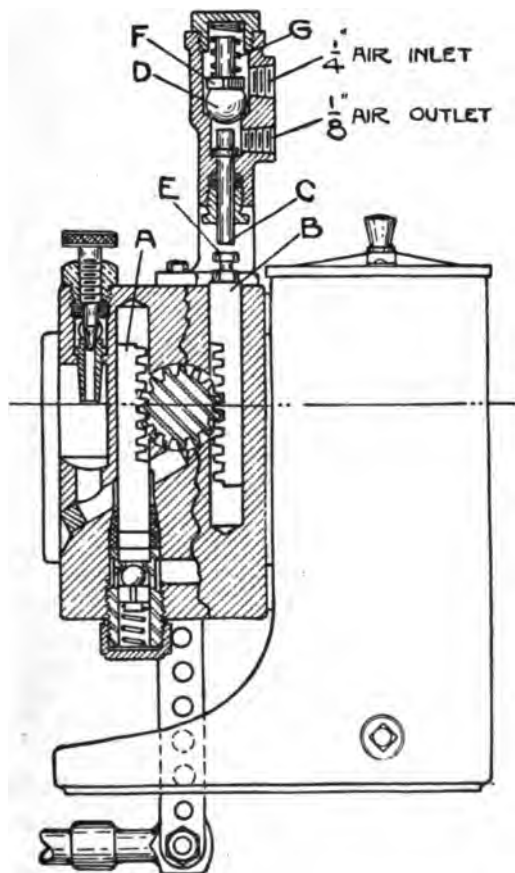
SEC. 10y.—Air spray attached to Richardson lubricator.
